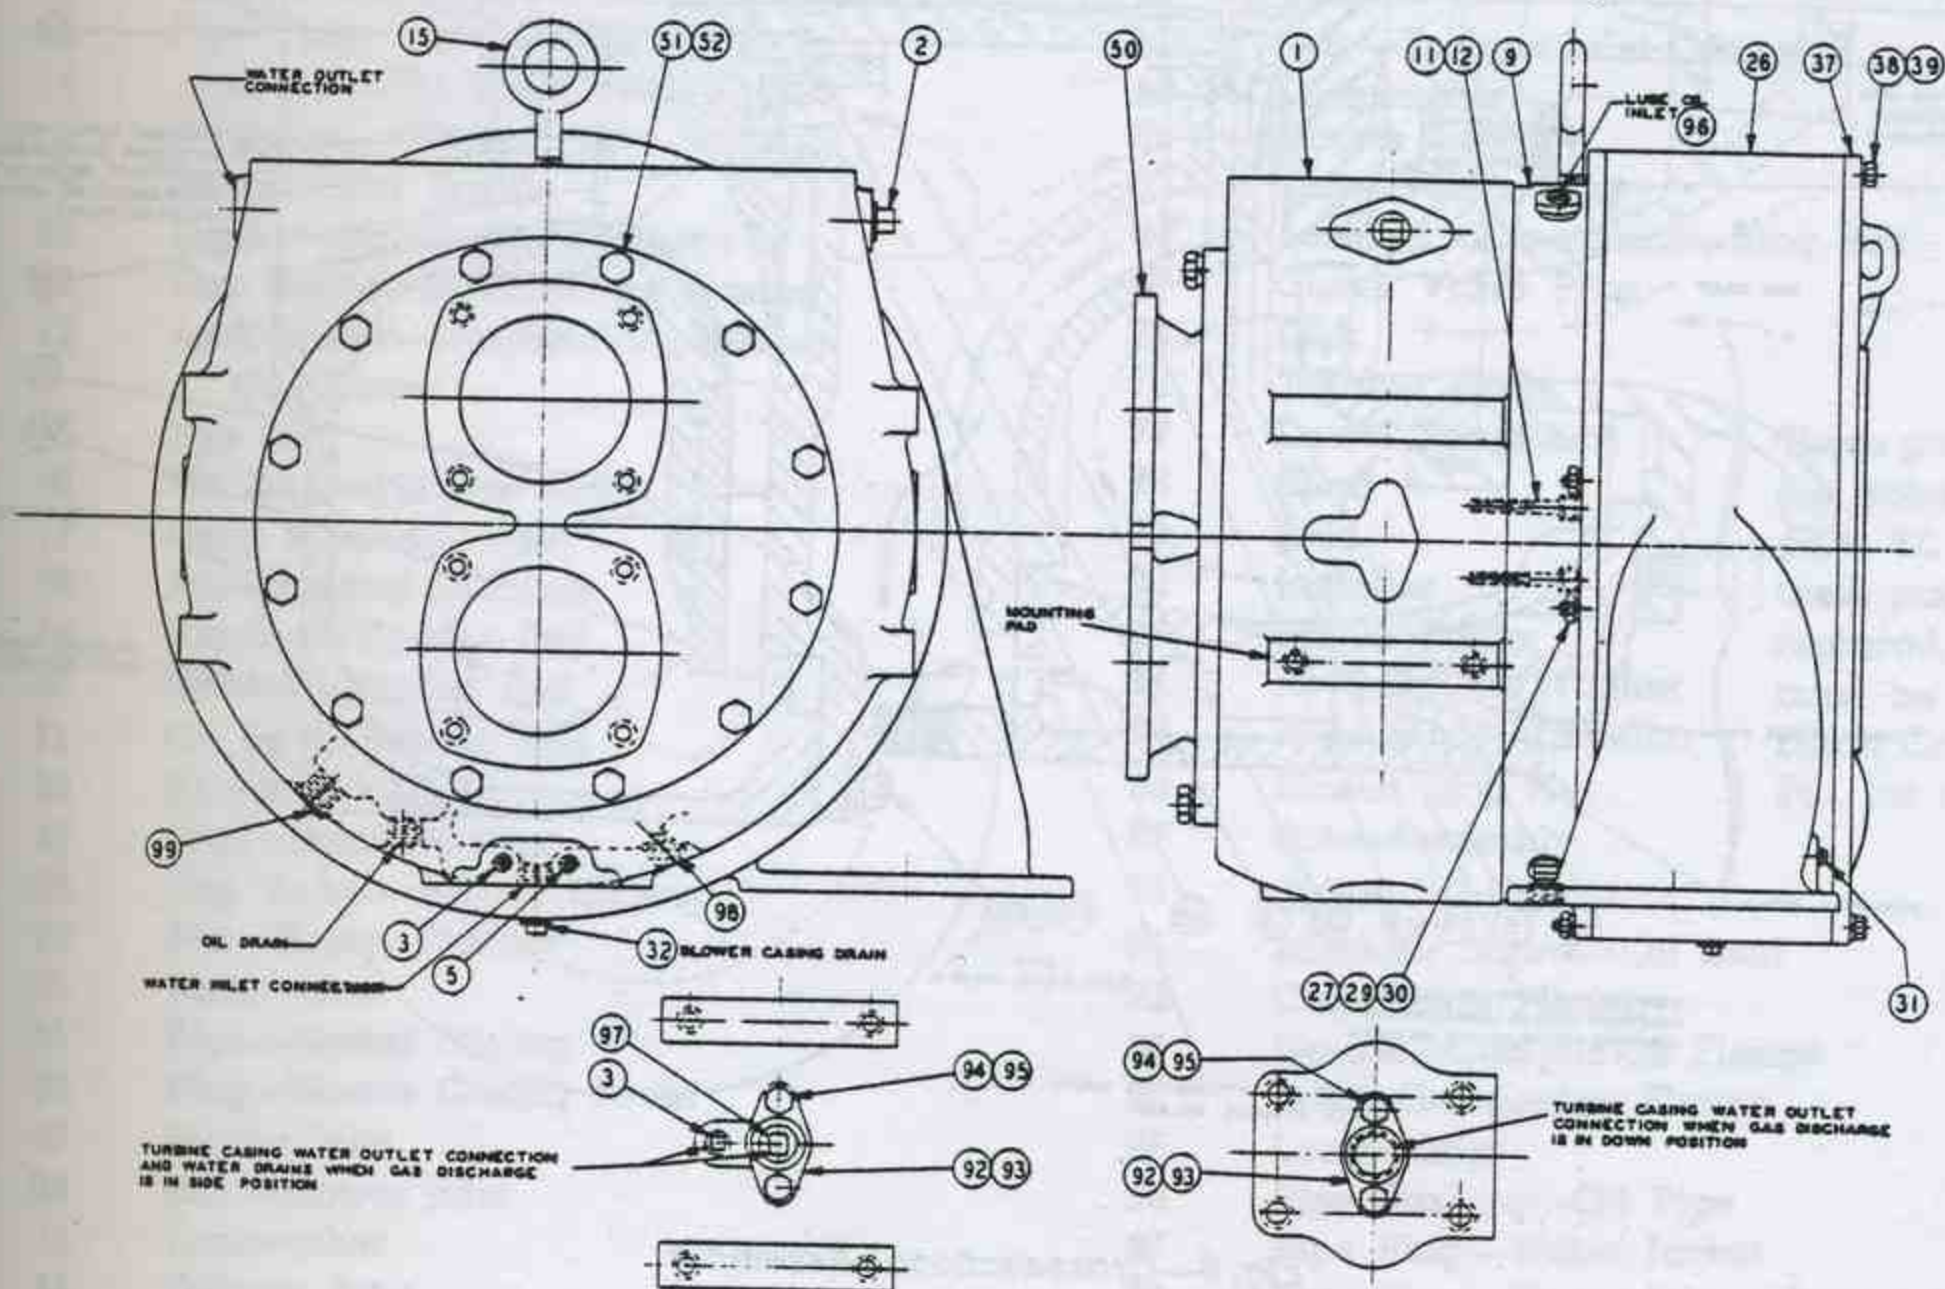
Outline Drawing L 20, L 40 and L 60 Turbocharger
